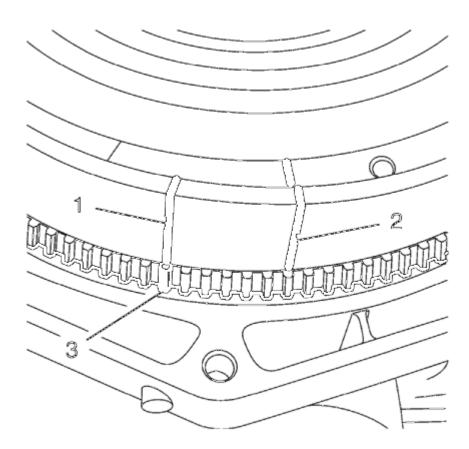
Mark On Flywheel And Toothed Ring For Starter Courtesy of GENERAL MOTORS COMPANY
